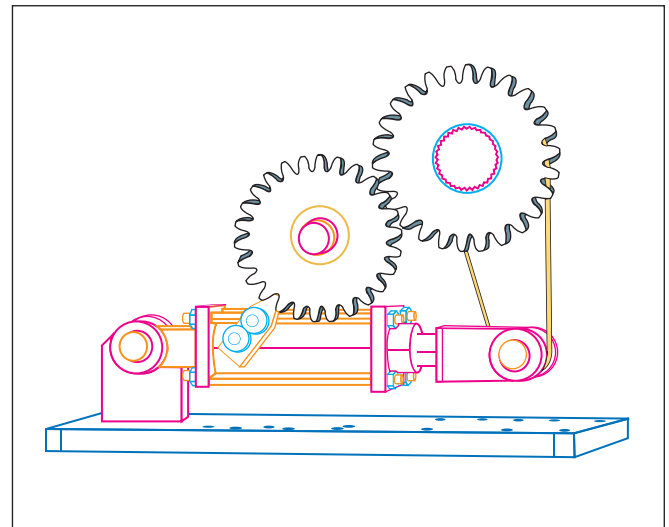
CAD rendering of SLAD showing the hydraulic cylinder and torque arm used to load the gears.
